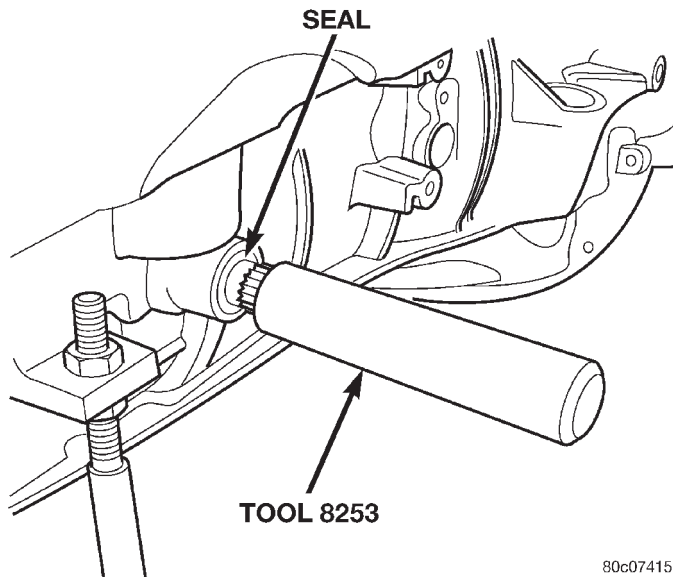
Install Selector Shaft Seal Using Tool 8253
